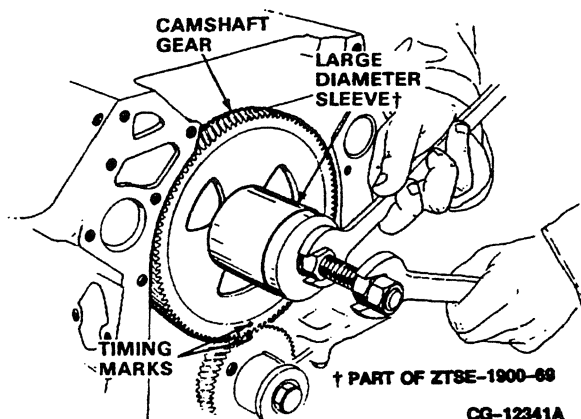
Cam Gear Installation and Timing Mark Alignment
